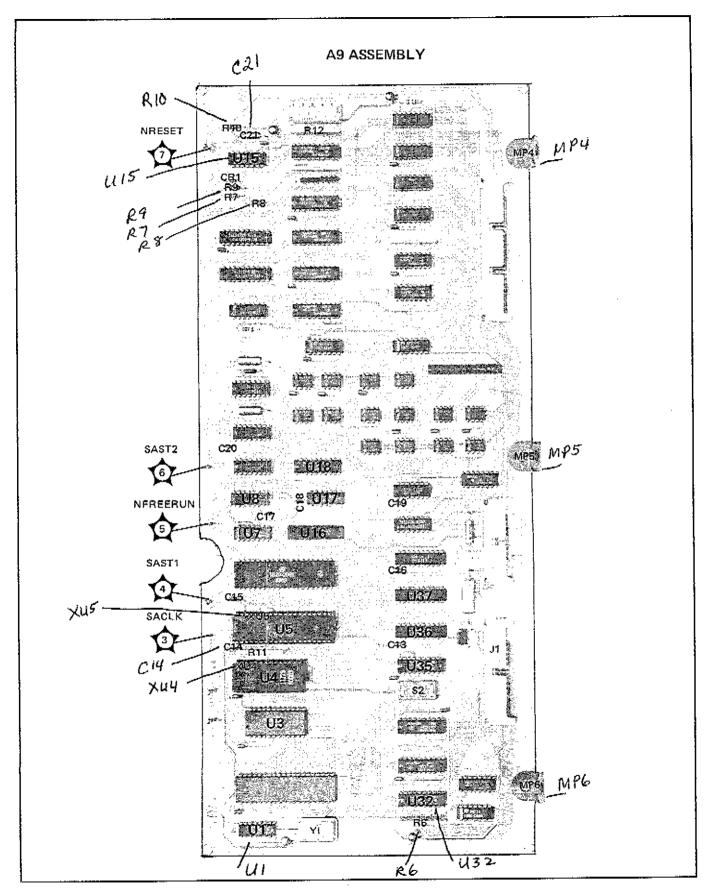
P/O Microprocessor Board Assembly Component Locations (P/O Change A)
